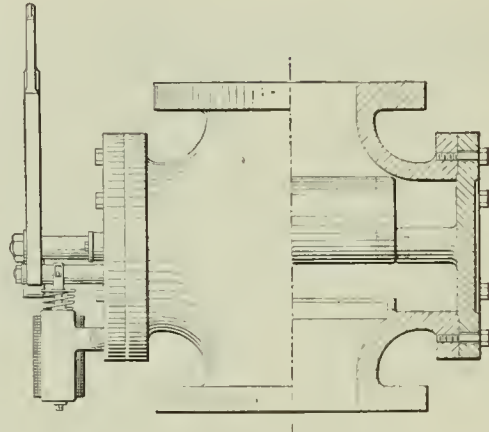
SECTIONAL VIEW OF VALVE AND SEAT
